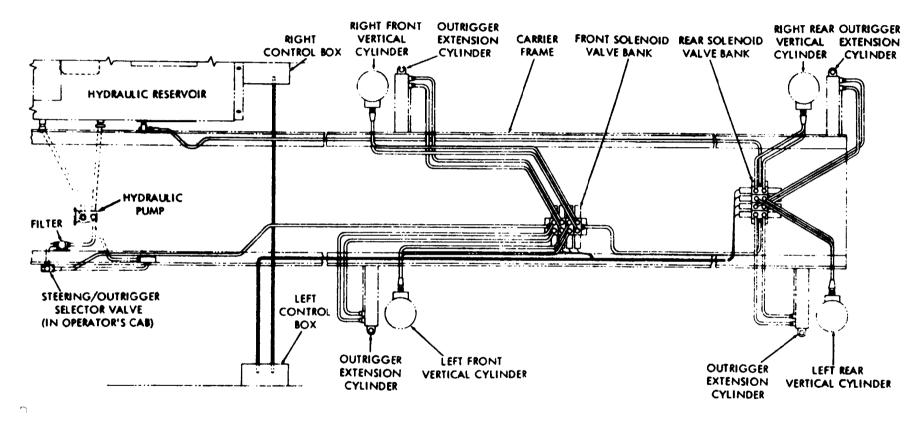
Hydraulic Outrigger Control System (8100J3980)
